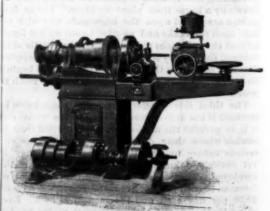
BOLT THREADING MACHINE WITH CUTTING OFF ATTACHMENT.
